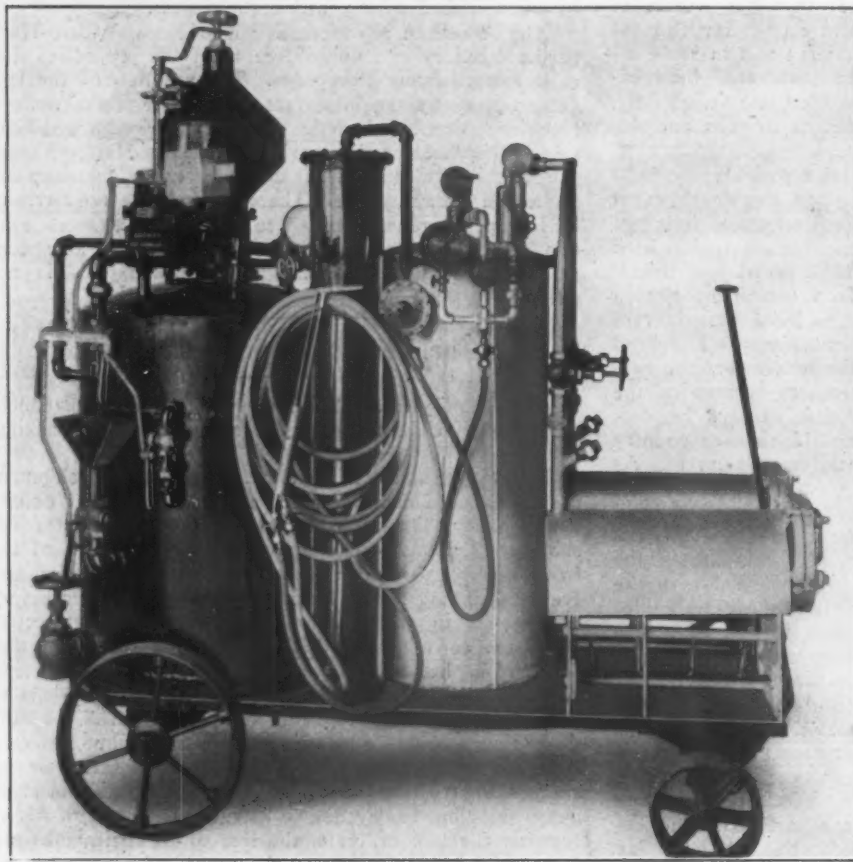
The New Portable Oxy-Acetylene Welding Machine Built by the Oxy-Carbi Company, New Haven, Conn.
